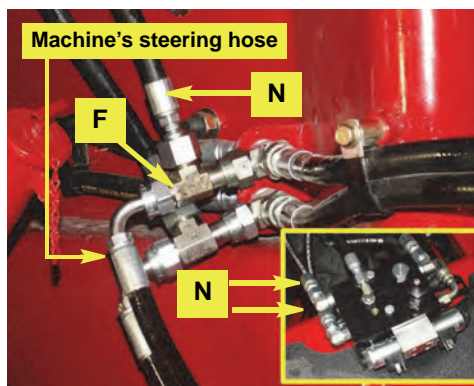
Steering hose (second) installed at run-tee and, inset, steering hoses connected at steering block
